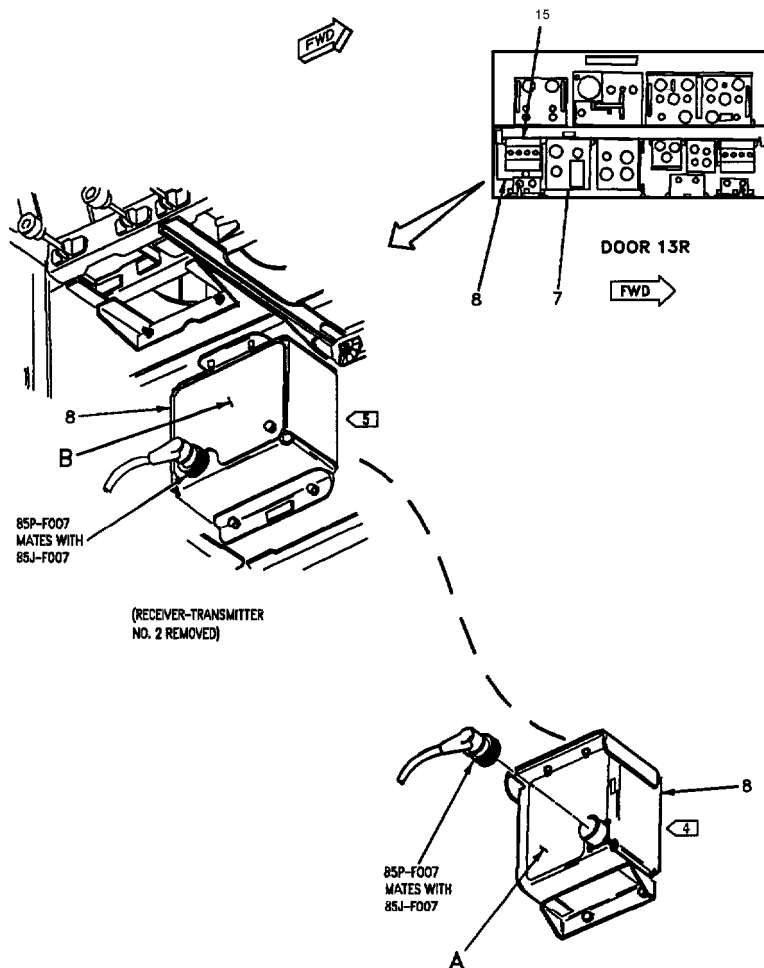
Electrical Boresight Compensation System Locator (Sheet 2)
